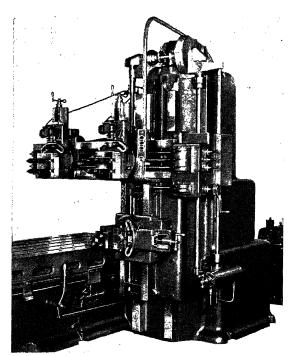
Open-side planer. A planer is used in the machining of large flat surfaces. The open-side planer is used when the piece to be machined is so wide that it cannot pass between the uprights of a standard planer (see Fig. 98). In the open-side planer resistance to deflection is definitely lower. (Rockford Machine Tool Co.)
